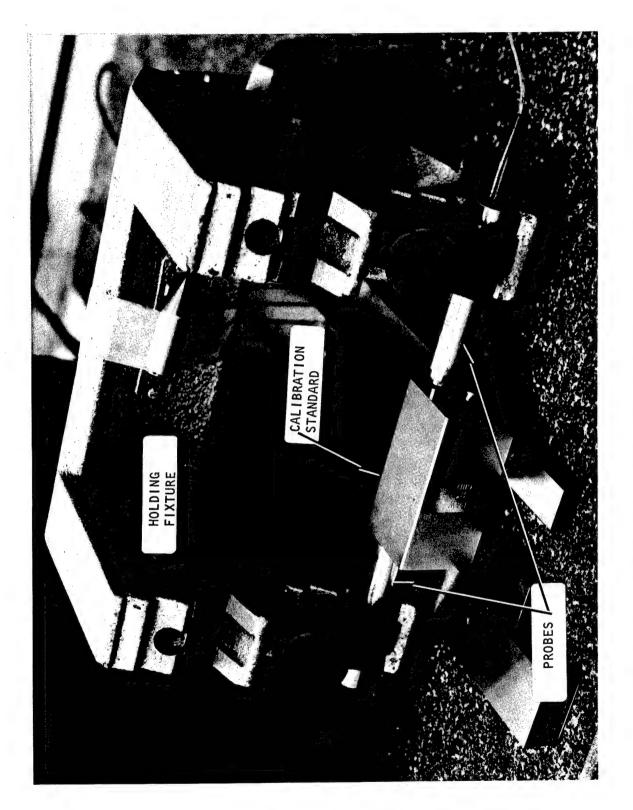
Detailed View of the Probes, Holding Fixture and Calibration Block
